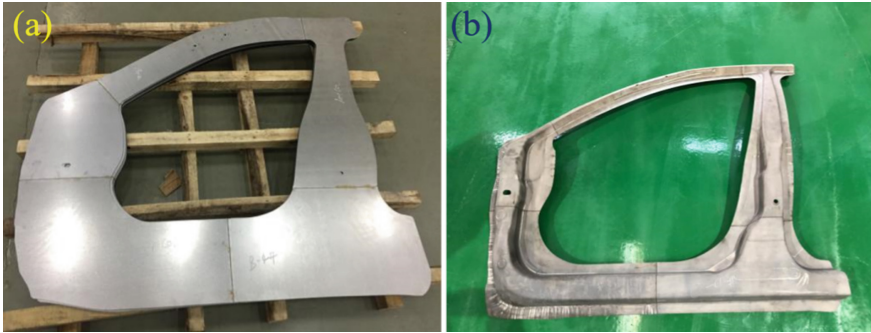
The appearances of the actual components: (a) the laser welded door ring, and (b) the laser welded door ring after hot stamping.
